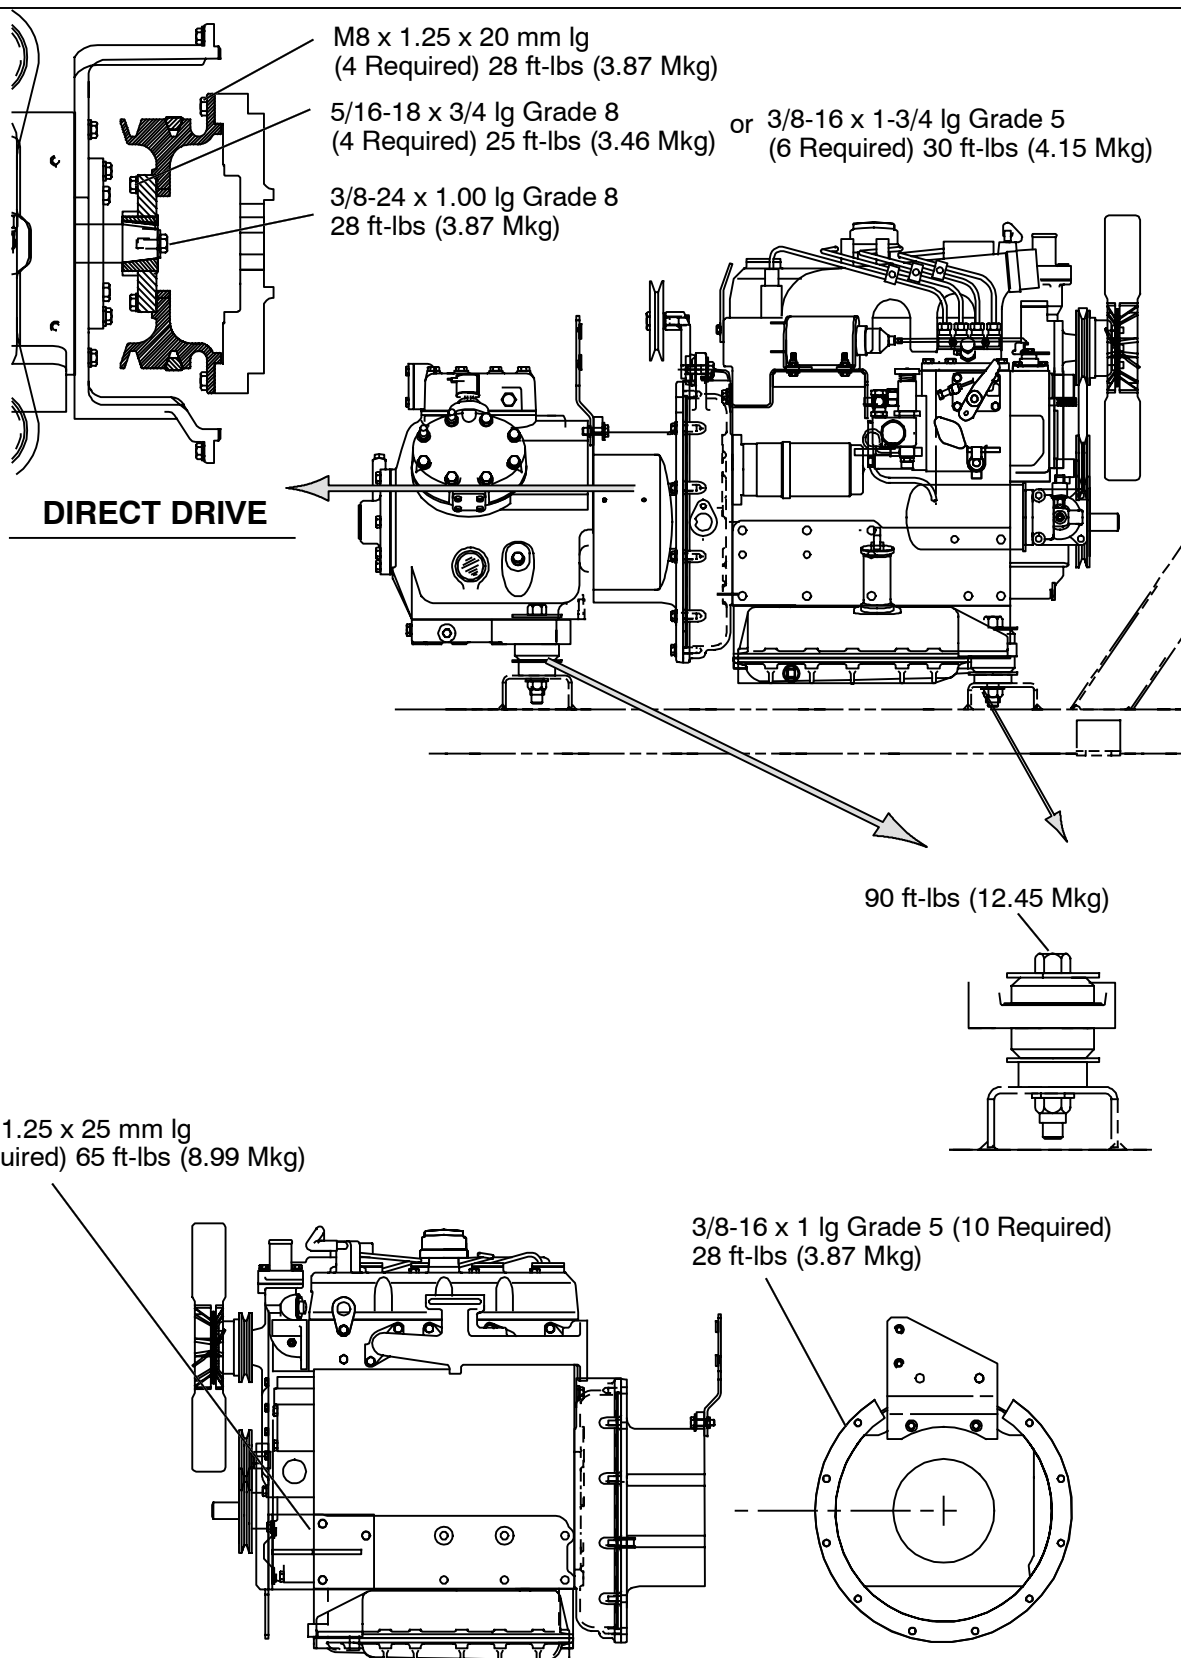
Unidrive Torque Requirements - Non ESC Engine
